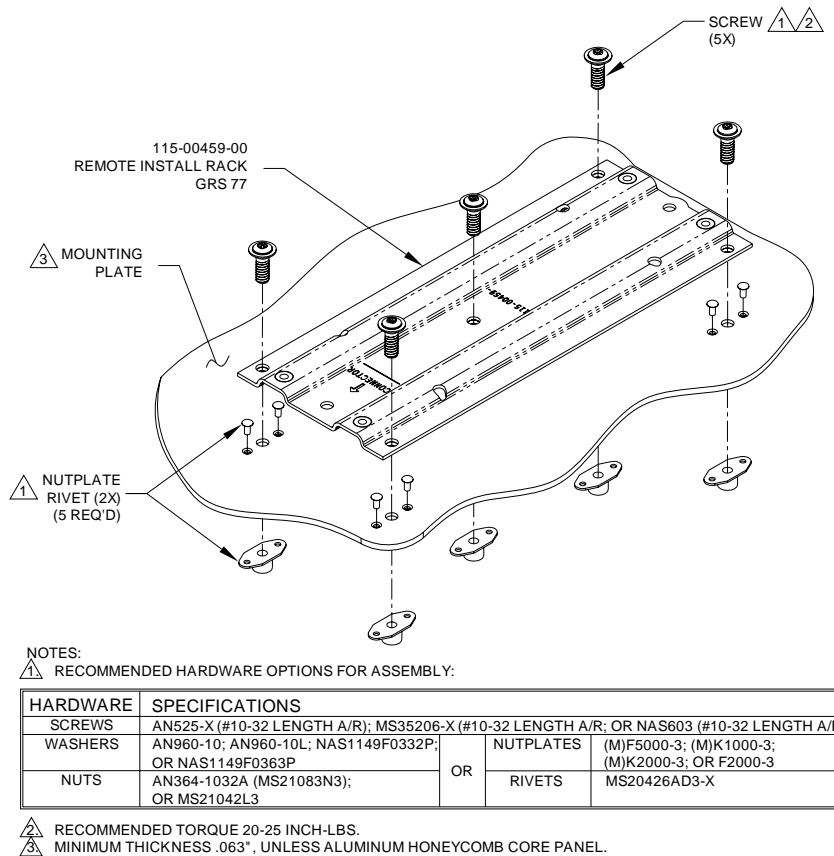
Installation of the Mounting Rack to the Mounting Plate
